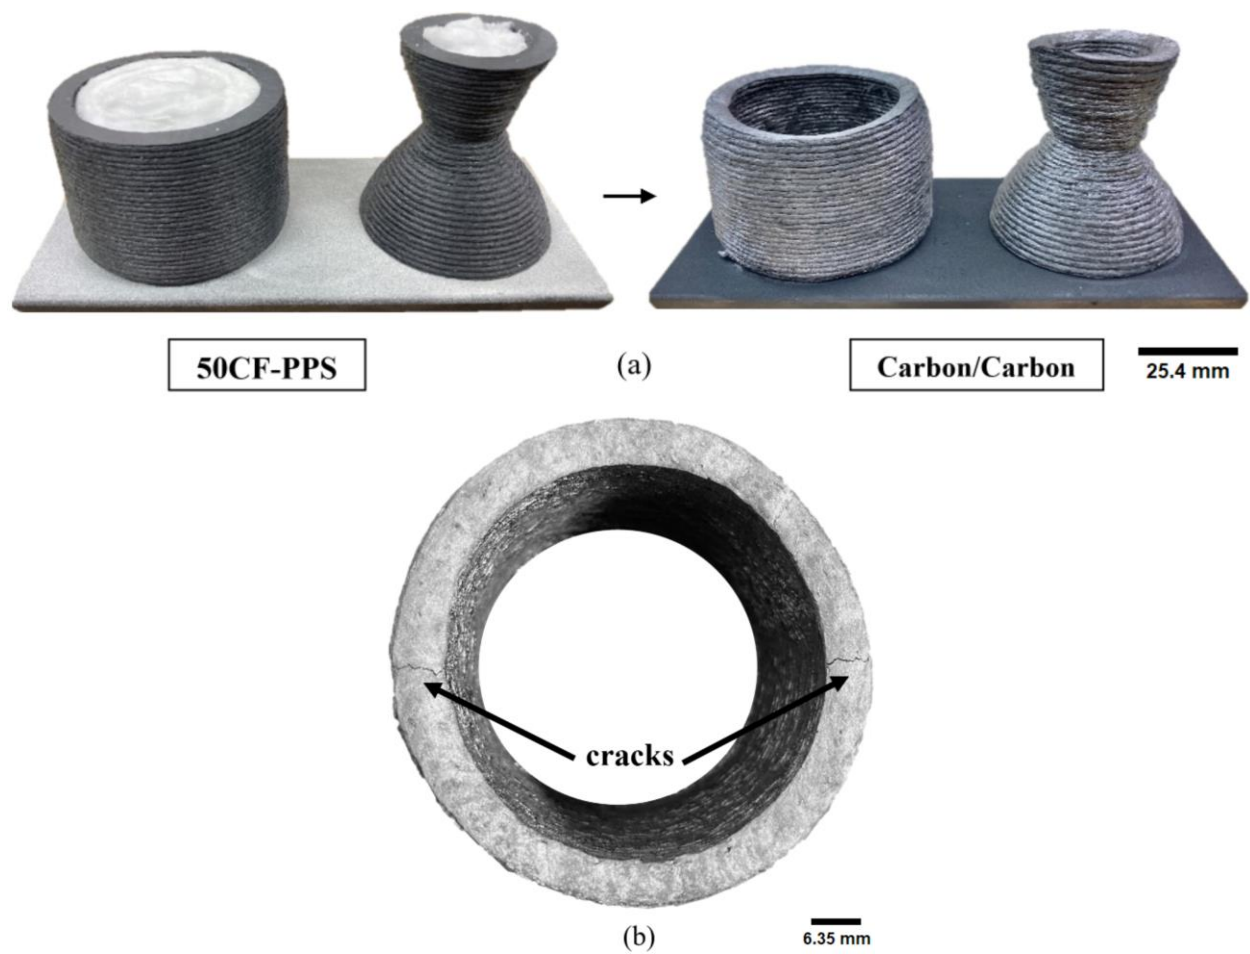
The pre- and post- pyrolysis states for the test pieces (a) and the cracks in the top layer of the cylinder test piece due to removable internal support.
